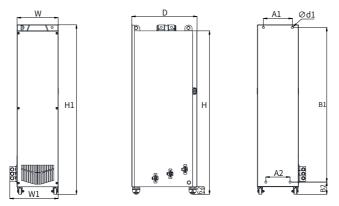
Overall and mounting dimensions of structures T10 to T12 (without reactors)
